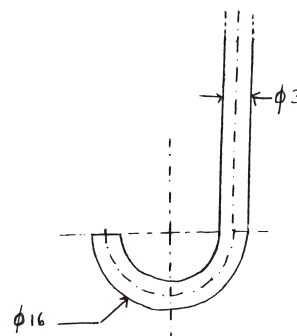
Dimensions of the free tube made with a stainless steel tube of 3 mm of external diameter, [mm].
